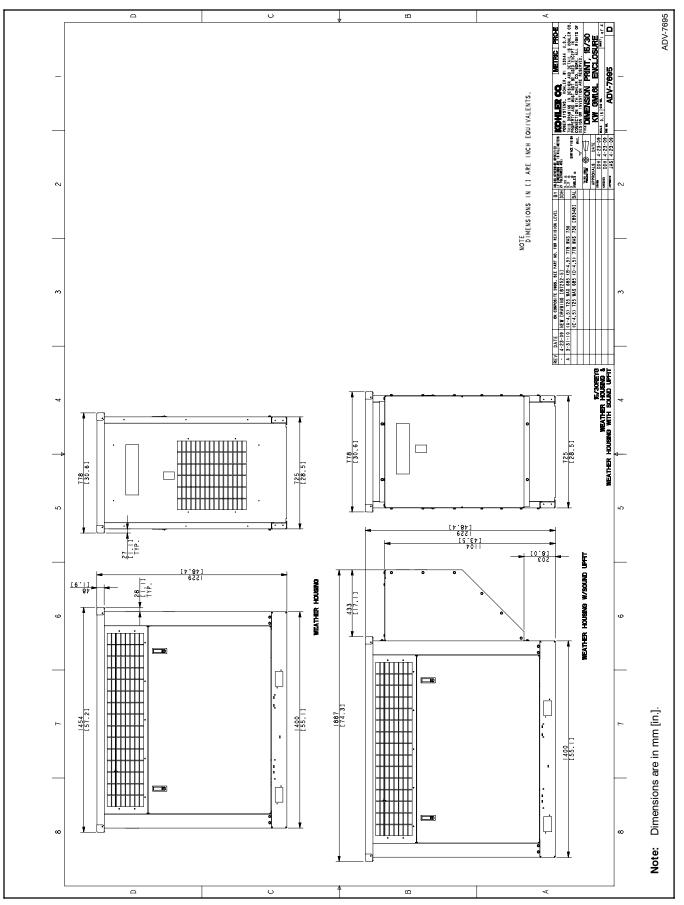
Dimension Drawing, ADV-7695, Sheet 1, Weather Enclosure and Weather Enclosure with Sound Kit
